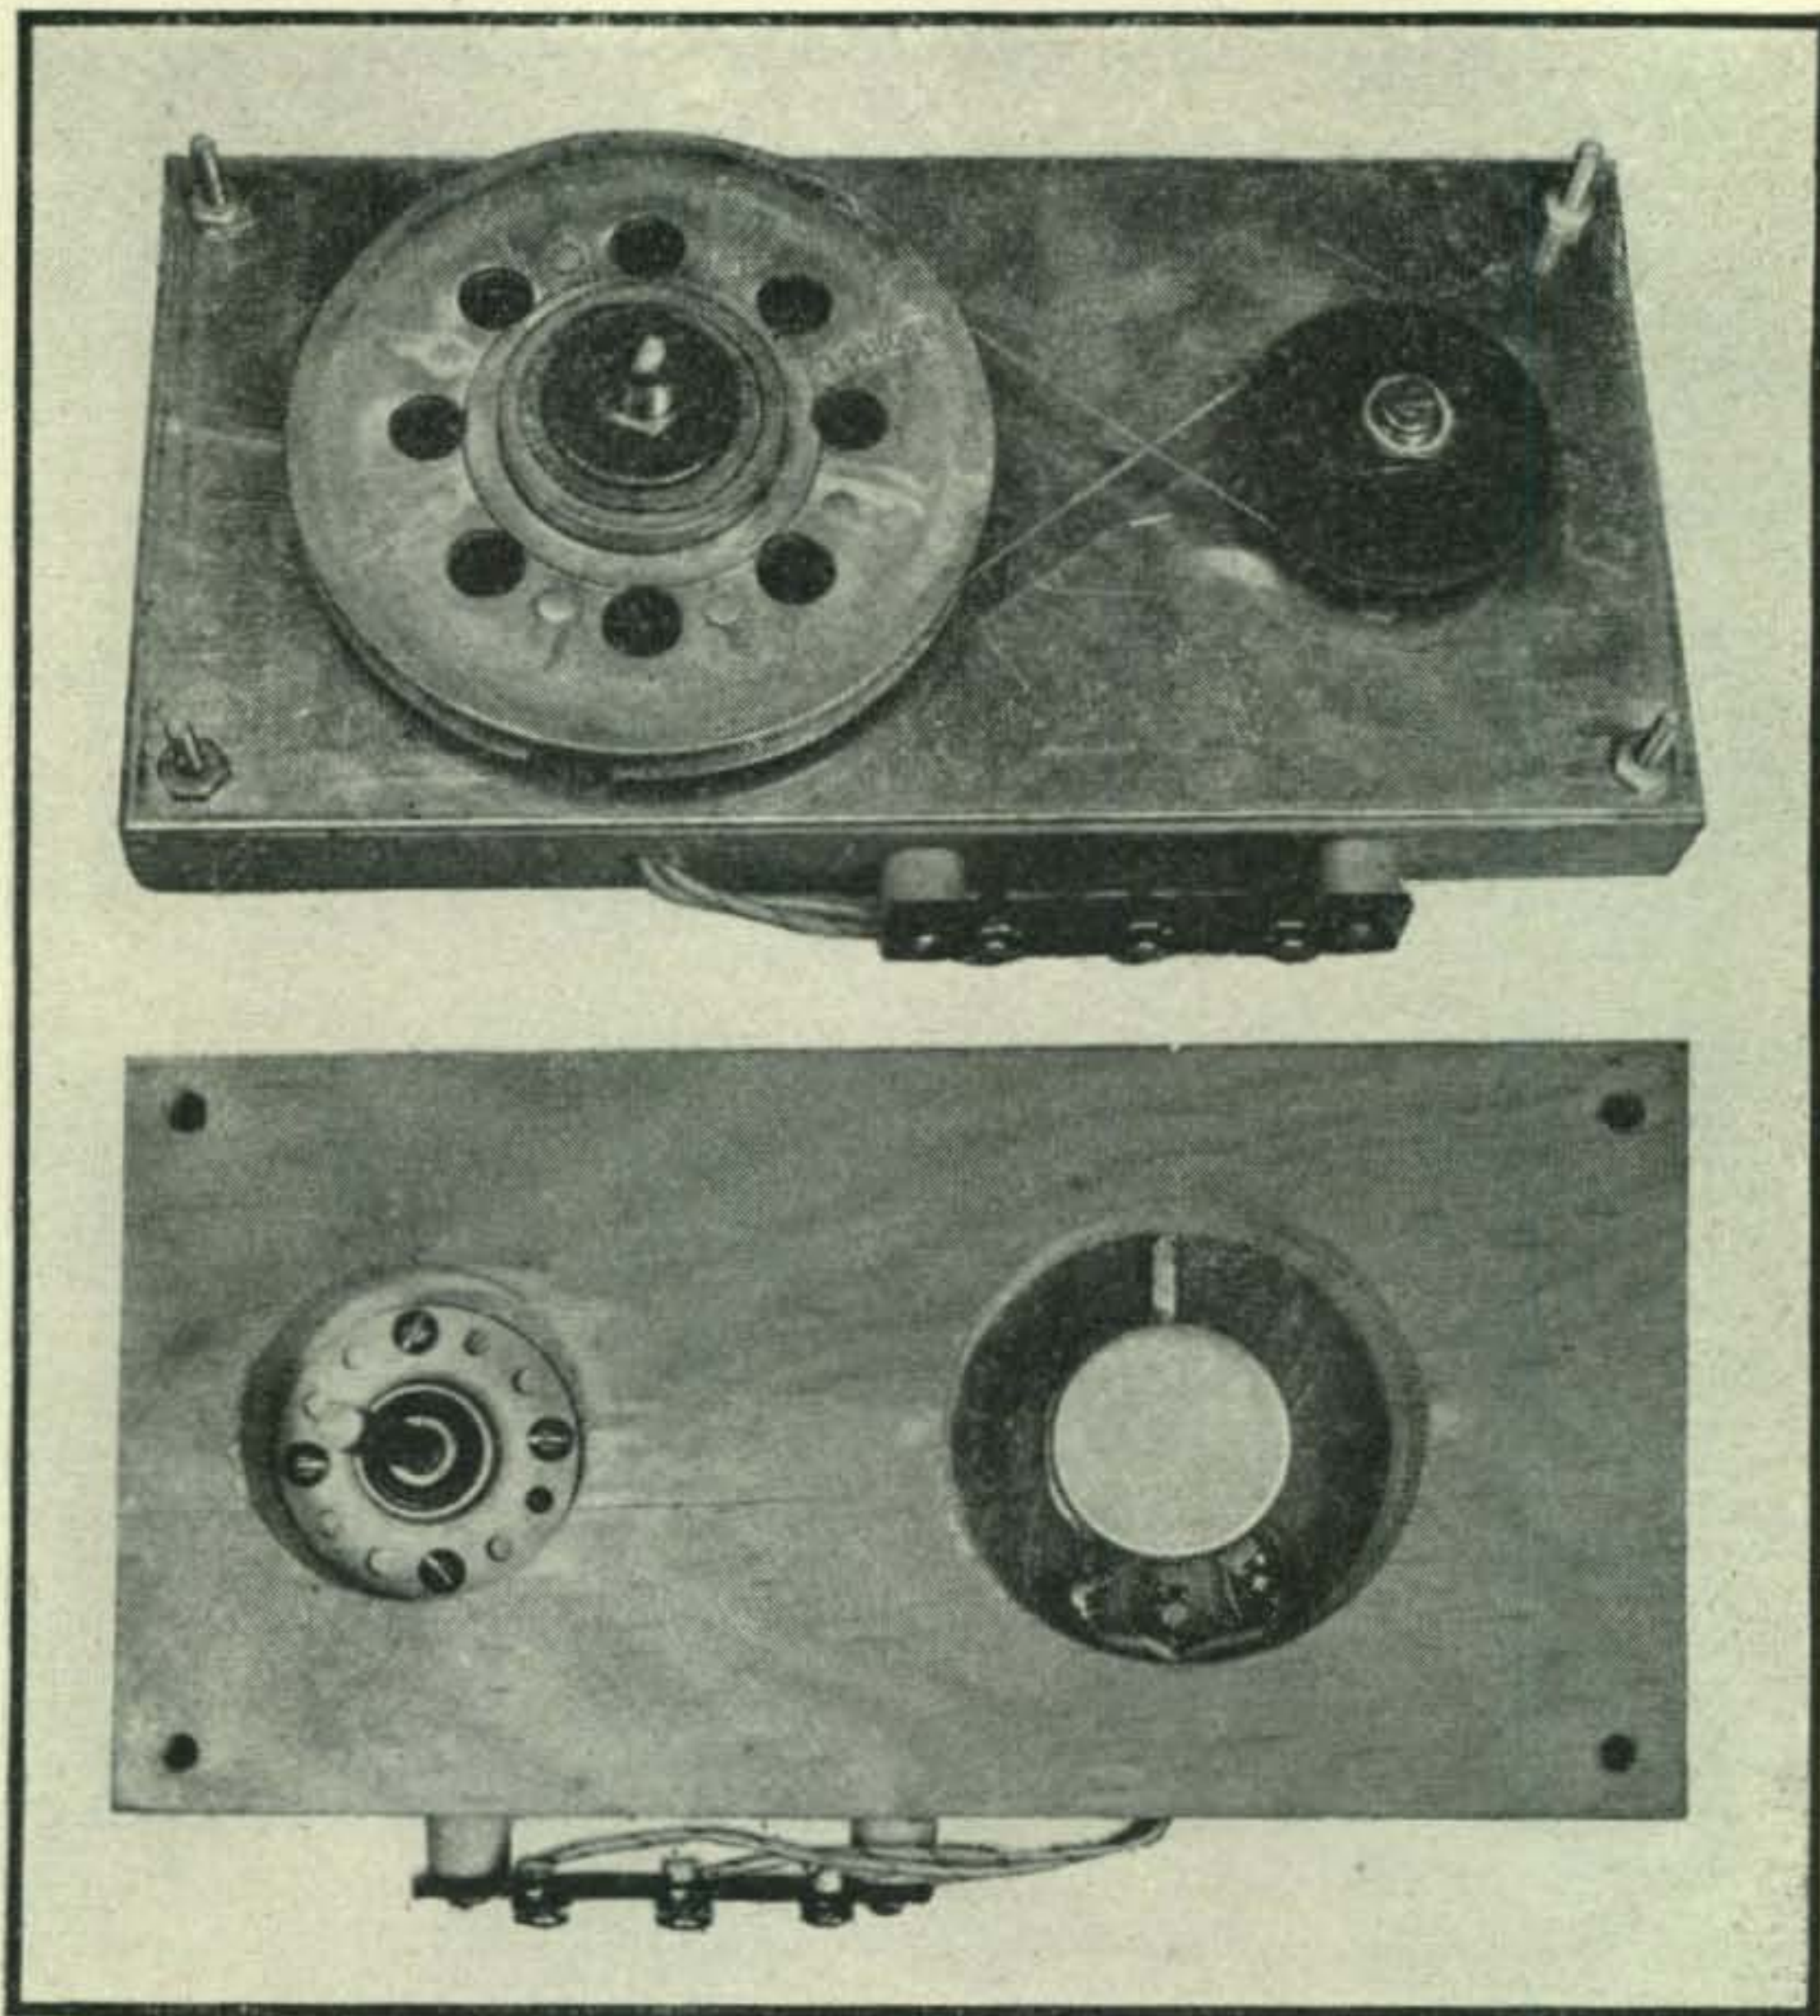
(top). Potentiometer assembly for mounting in the antenna tower. Fig. 6. (bottom). The bearing is an aircraft bell-crank ball-bearing.
